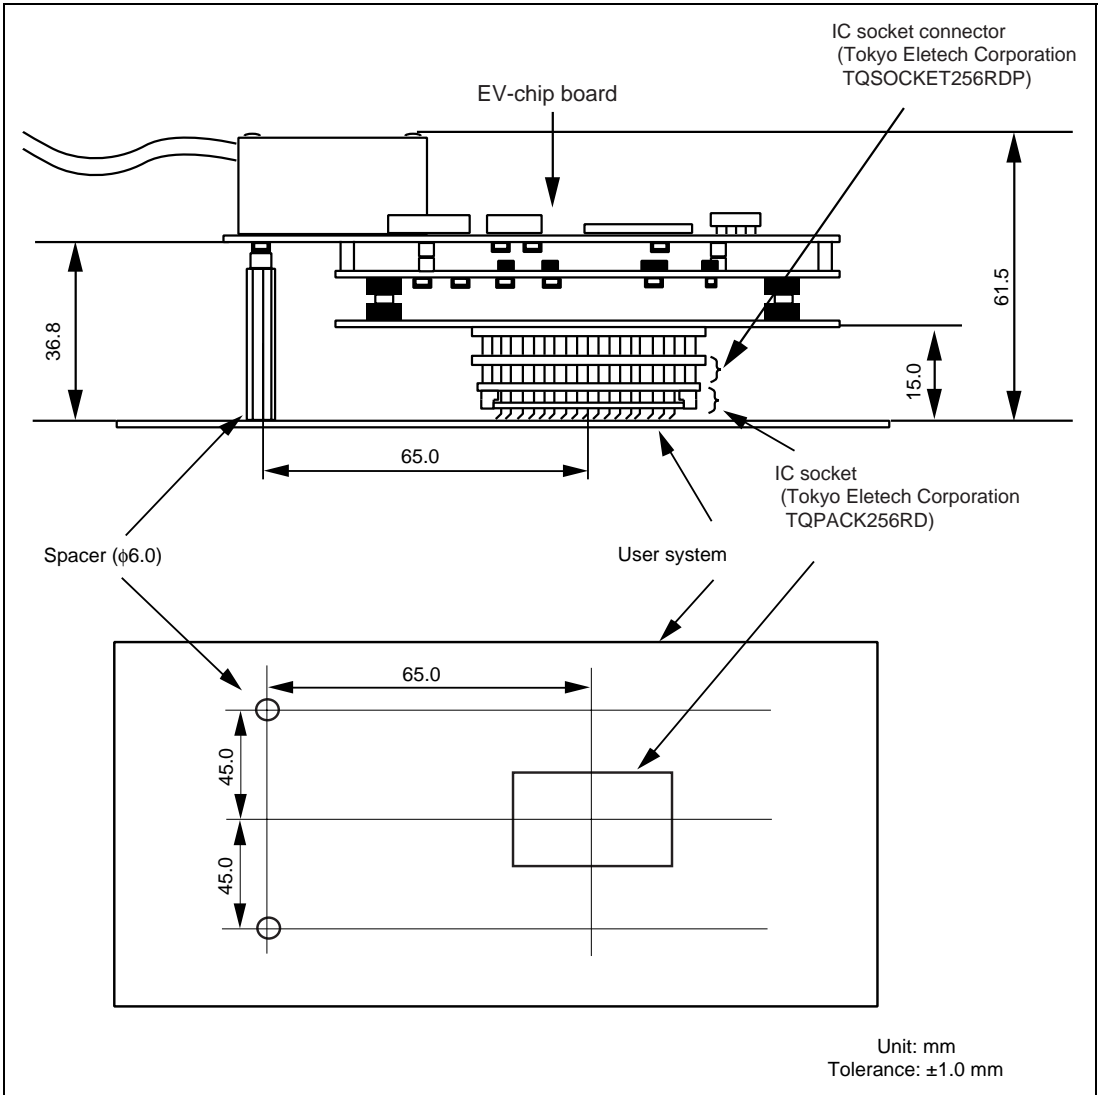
Resulting Dimensions after Connecting User System Interface Board
